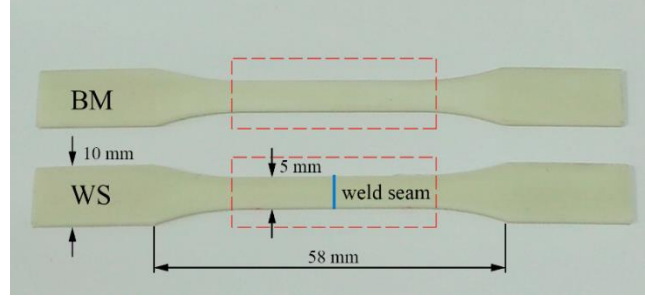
Base material (BM) and weld seam (WS) specimen. The red line portion shows the different area between BM and WS specimen. The blue line represents the position of weld seam.
